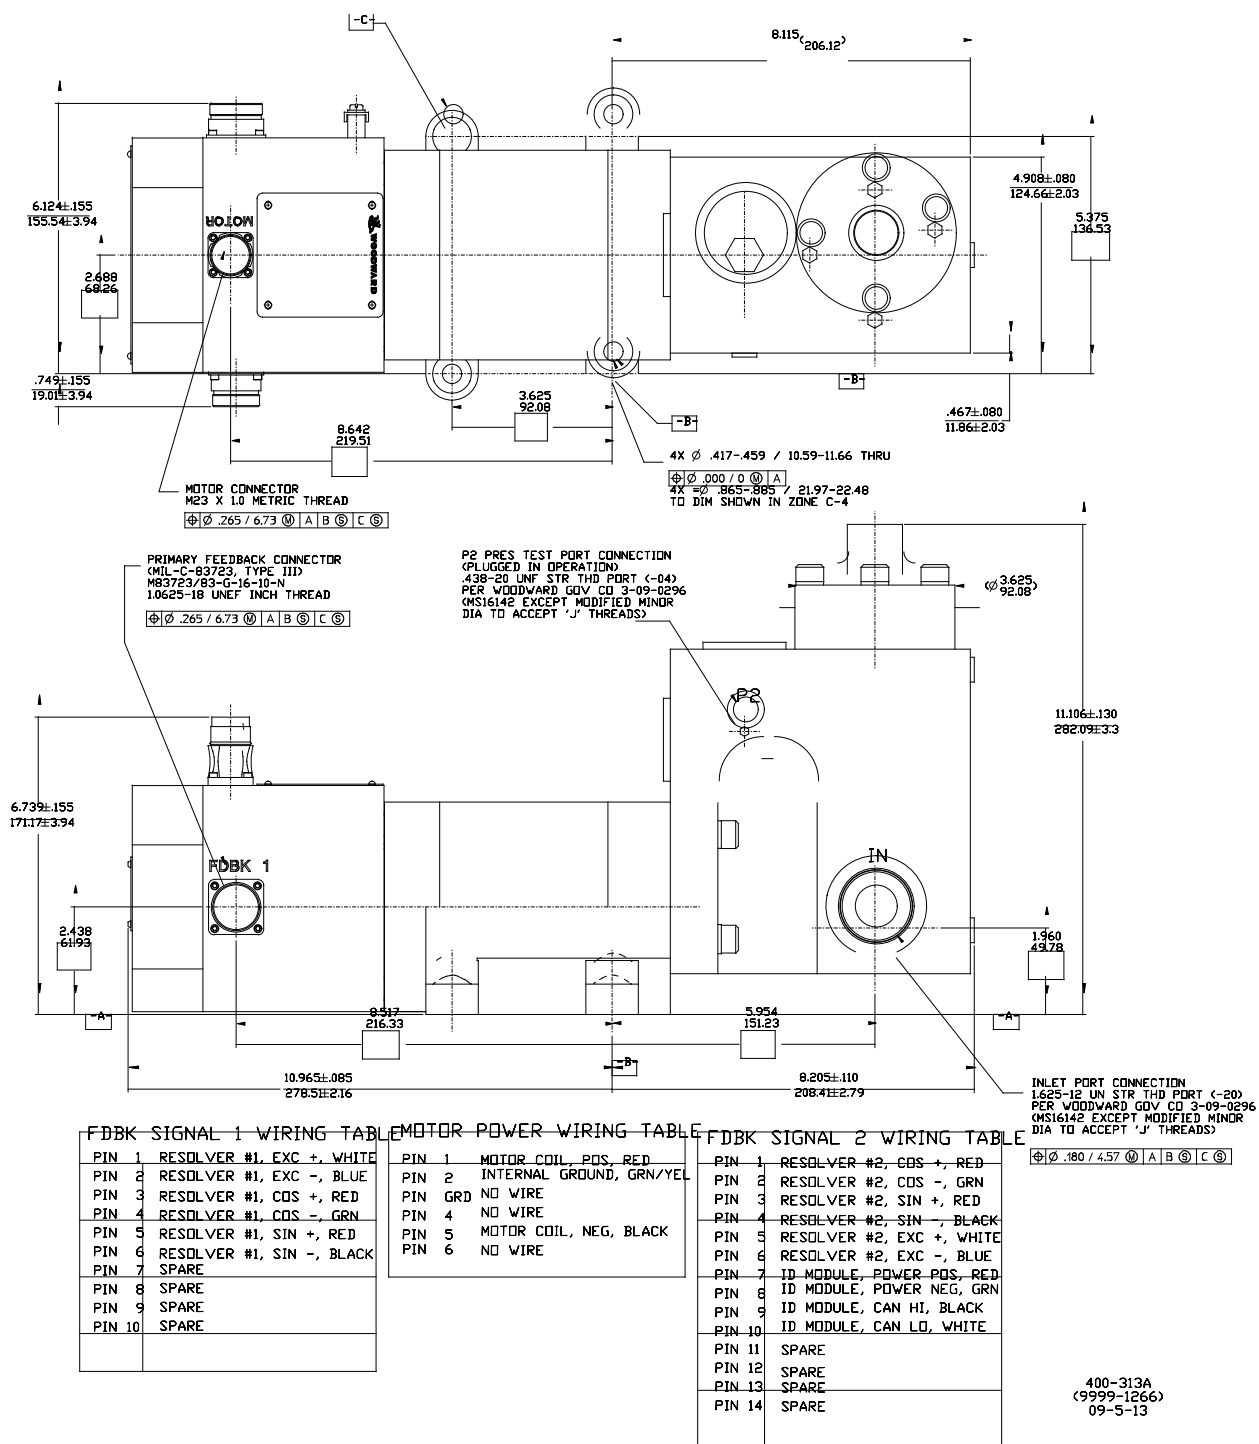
1 1/4-Inch LQ25T Outline Drawing
